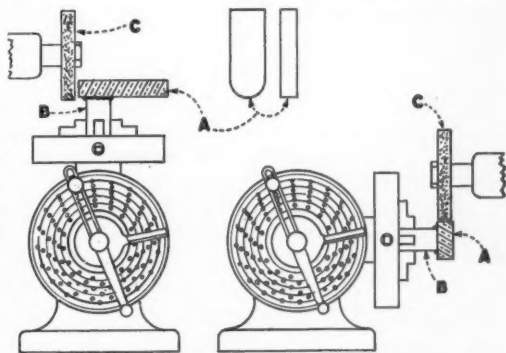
(Left)—Drawing showing set-up that was used to grind radii on die sections. Fig. 3 (Right)—By using this set-up, the face of the grinding wheel can be used.
